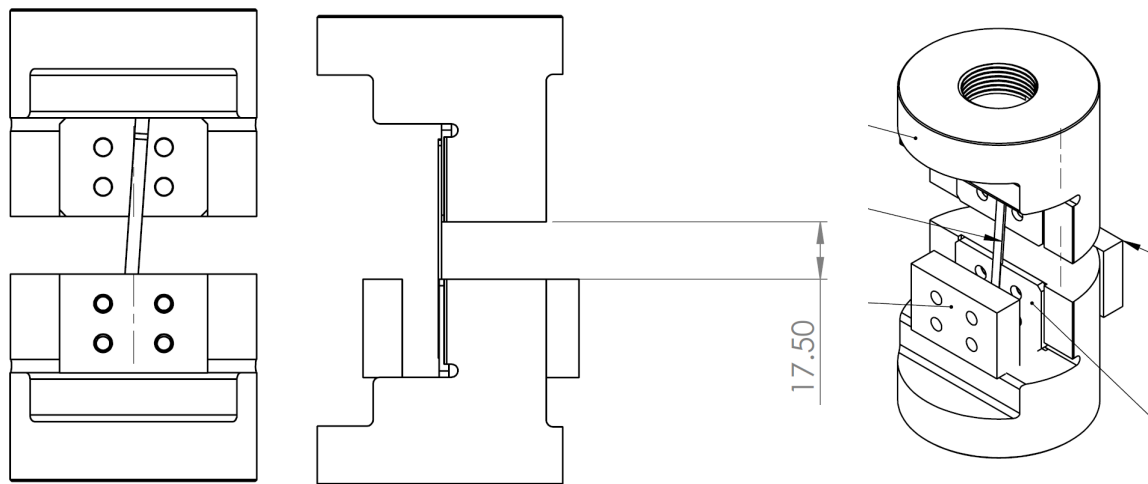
Full rig design showing slotted support back plates and front sample clamping plates.
